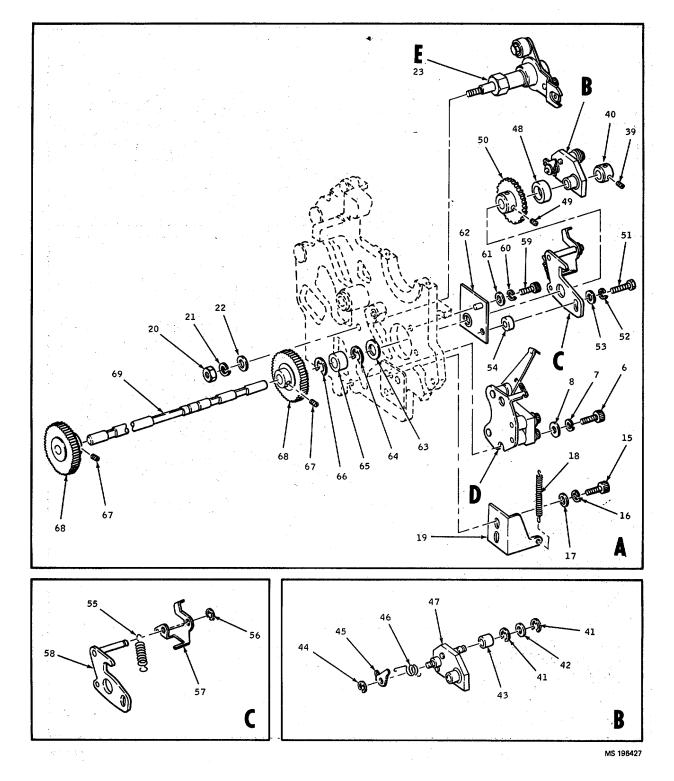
Paper Feed Mechanism and Power Shaft, Exploded View (Sheet 2 of 3)
